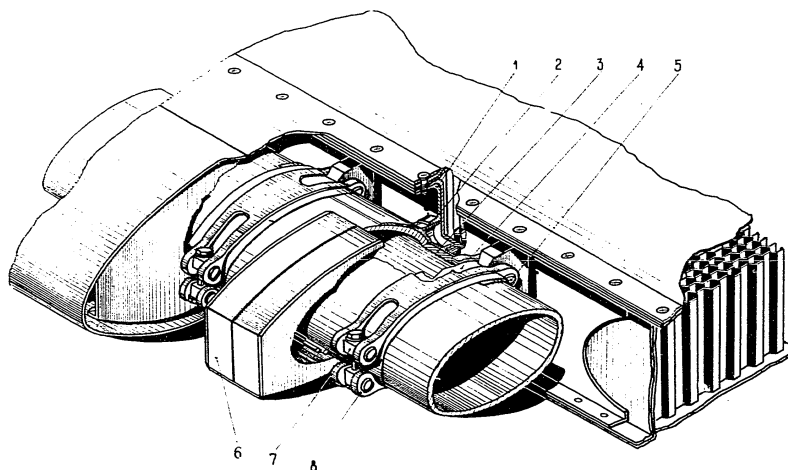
BLADE SECTION TRAILING EDGE-TO-SPAR ATTACHMENT
